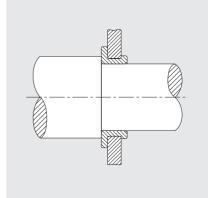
Type 1320-7.. with stepped shaft. The larger shaft diameter is on the side of the larger-diameter collar of the Plastic Plain Bearing. Absorption of axial forces possible.
